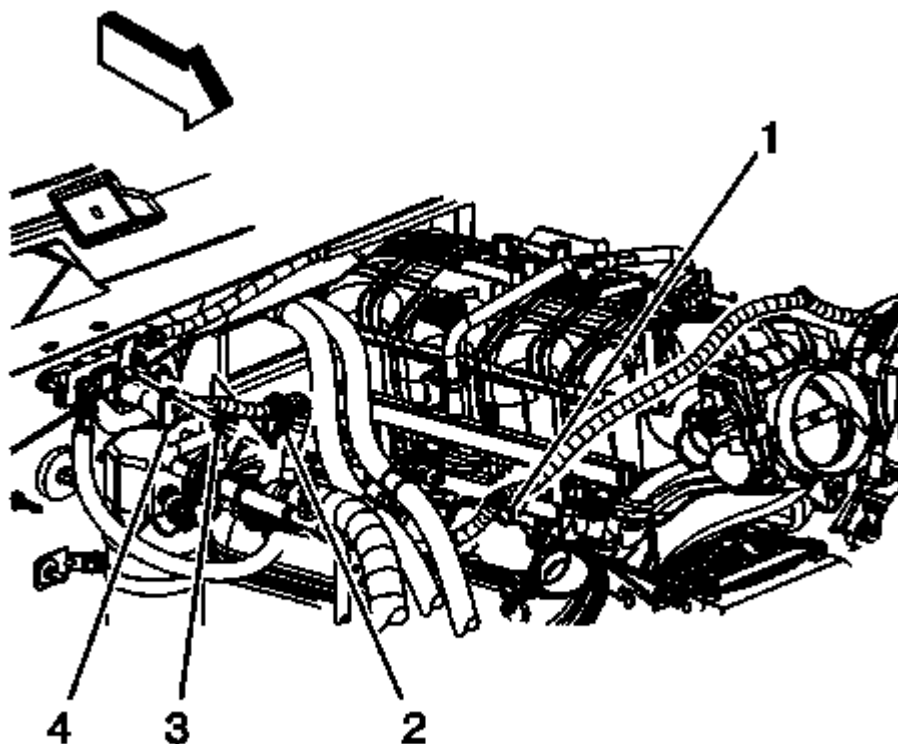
View Of Radiator Surge Tank Outlet Hose, Clamp & Water Pump
